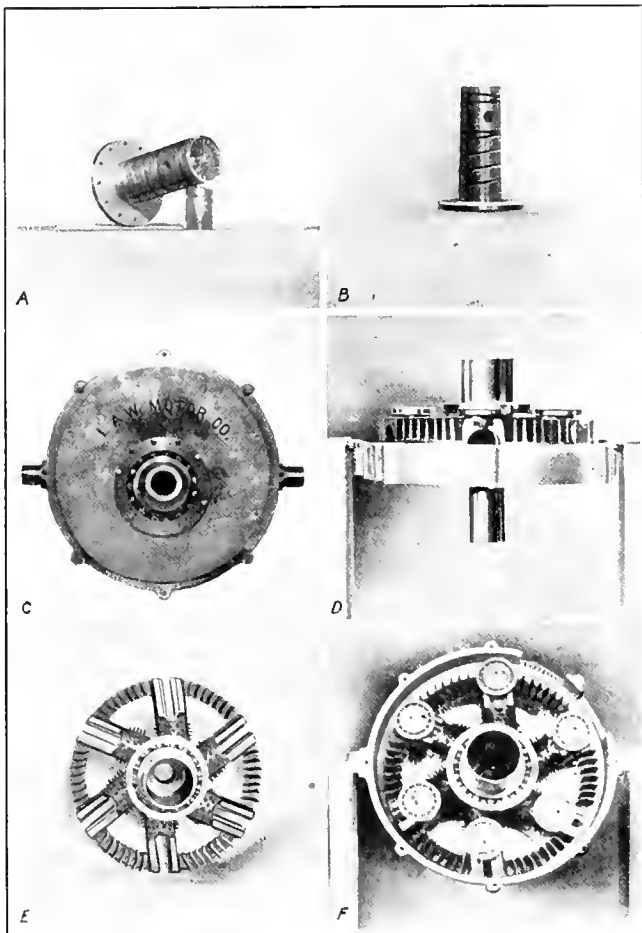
A. Supply Chamber. End View showing Heat-regulating Spines. B. Supply Chamber, seen from the Side. C. Motor Assembled. D. Side View of Motor with Part of Casing Removed. E. Cylinder Casting. F. Motor with Front Casing Removed
